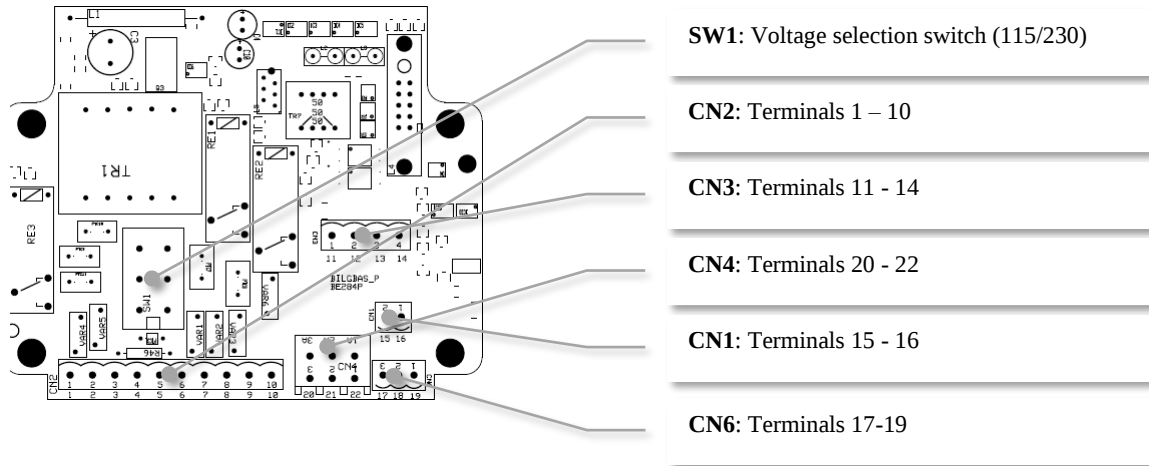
Base PCB of 115/230 VAC MASTER unit.
